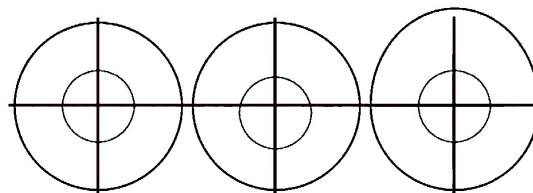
A schematic of a normal gear construction (left) and two machining errors (centre, eccentricity; right, oval-shaped worm gear) that will affect tracking.
